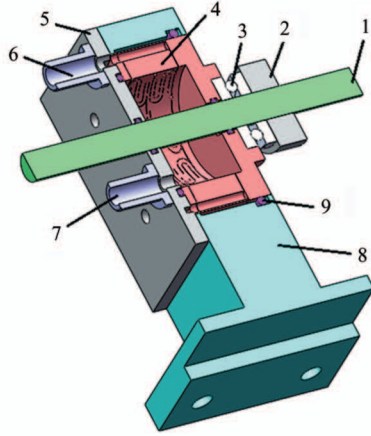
shows the 3D cross-sectional view of the shaft system consisting of IASFD, bearing block, thrust bearing, and thrust shaft. The thrust disk and the thrust ball bearing transmit the longitudinal vibration of the thrust shaft to IASFD, so the S-shaped elastomer deforms. Under the action of squeezing, the oil film in the squeeze film area of IASFD will form damping effect to suppress the longitudinal vibration of the thrust shaft.
